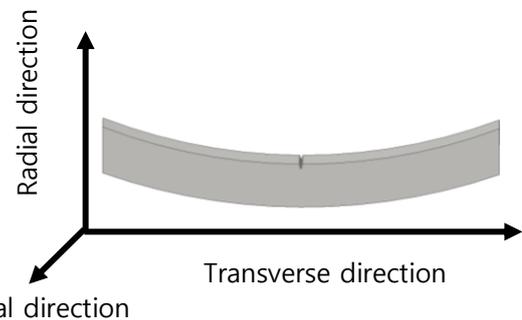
Geometry of CB specimen machined from Zr-2.5Nb pressure tube.
